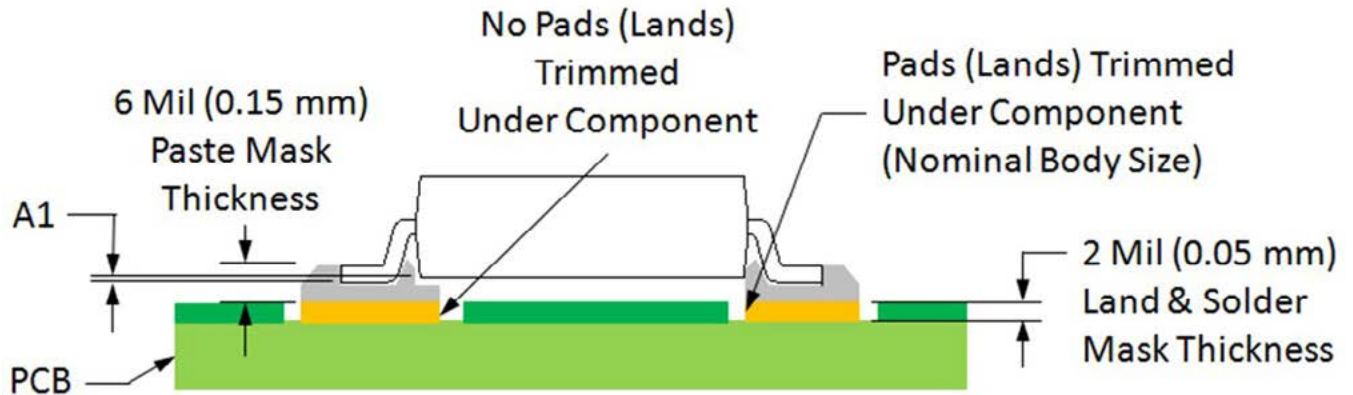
IPC argues that PCB designers should not trim the pads under low-profile components.
